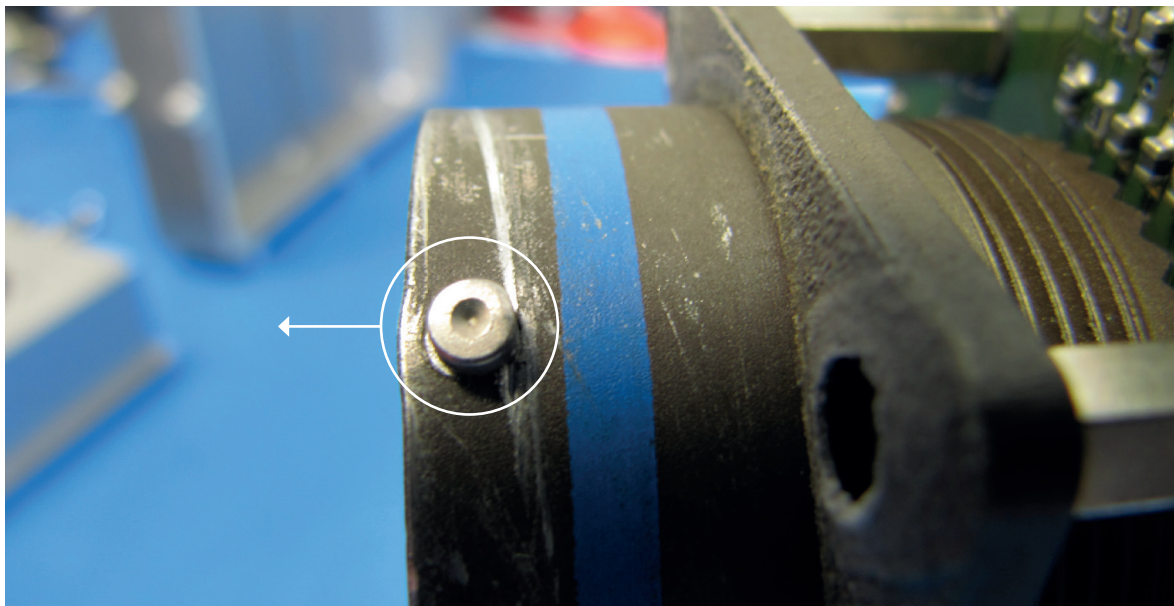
Damaged FADEC socket. (Source: Technify Motors)
